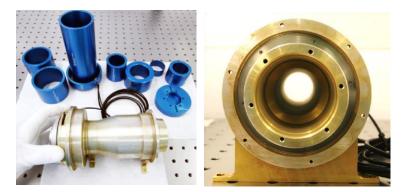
Test equipment at ViaLight's manufacturing facilities.
